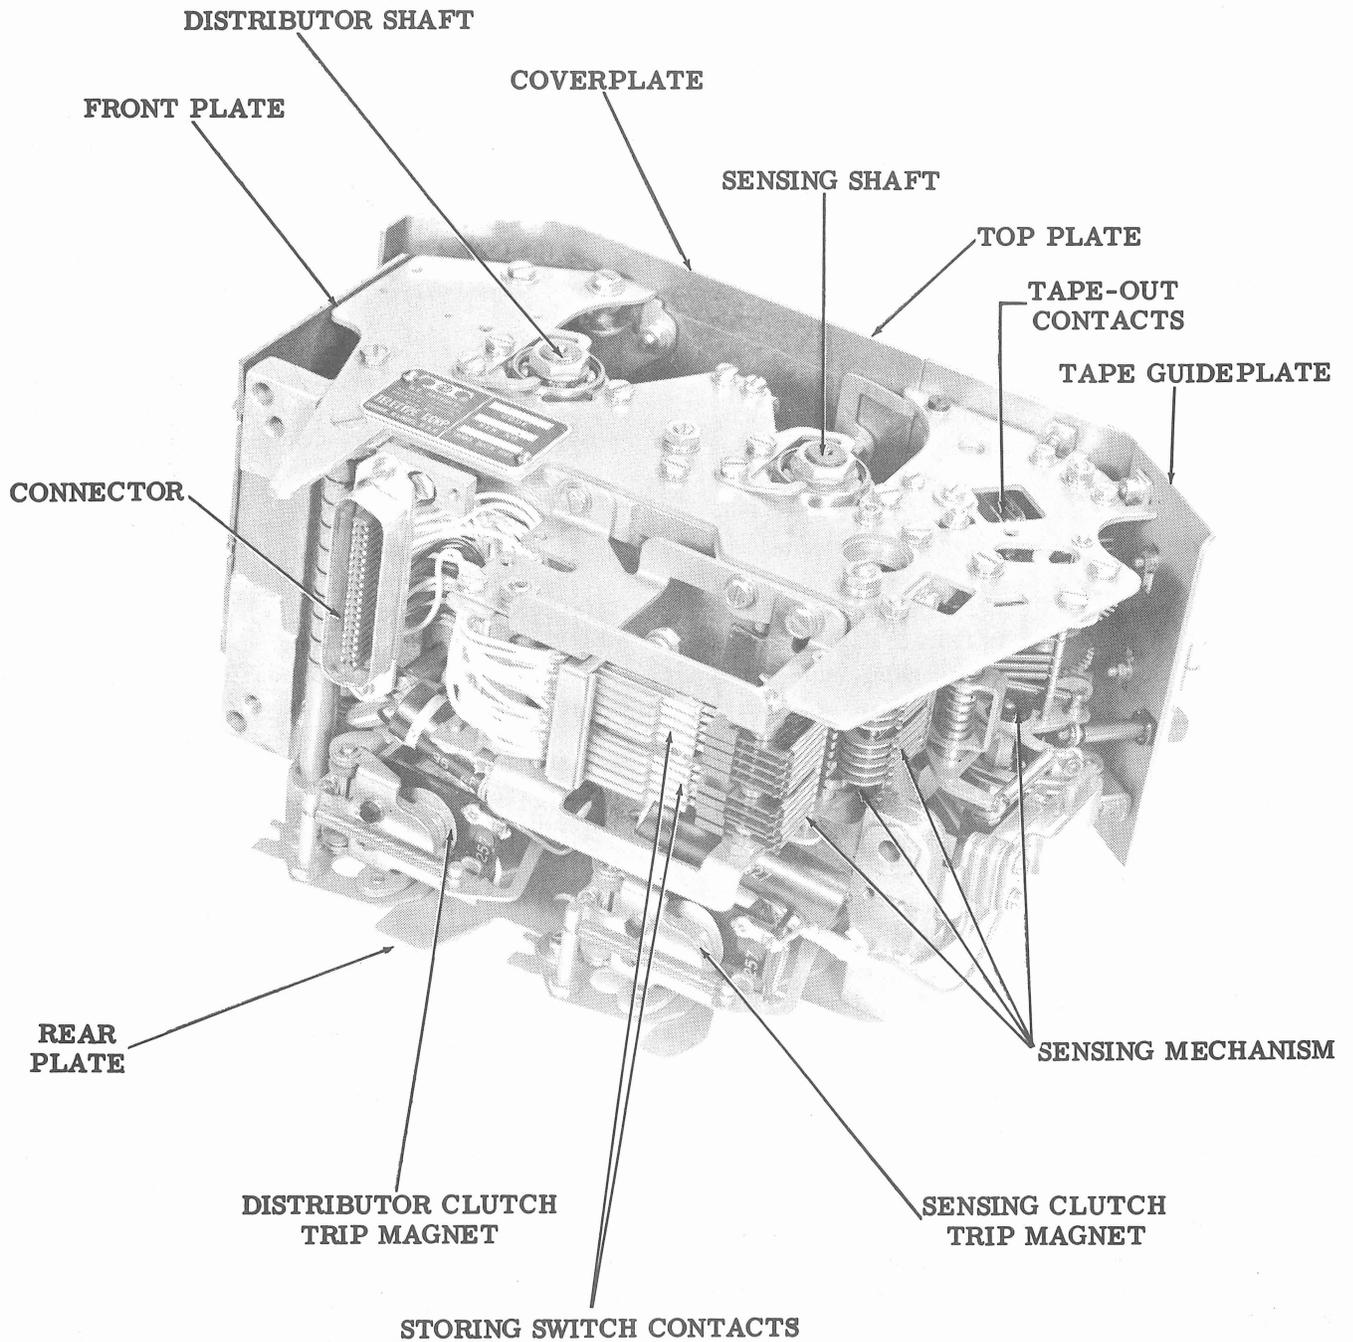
Typical 35 Transmitter-Distributor, Top, Cover, and Tape Guideplates Removed
